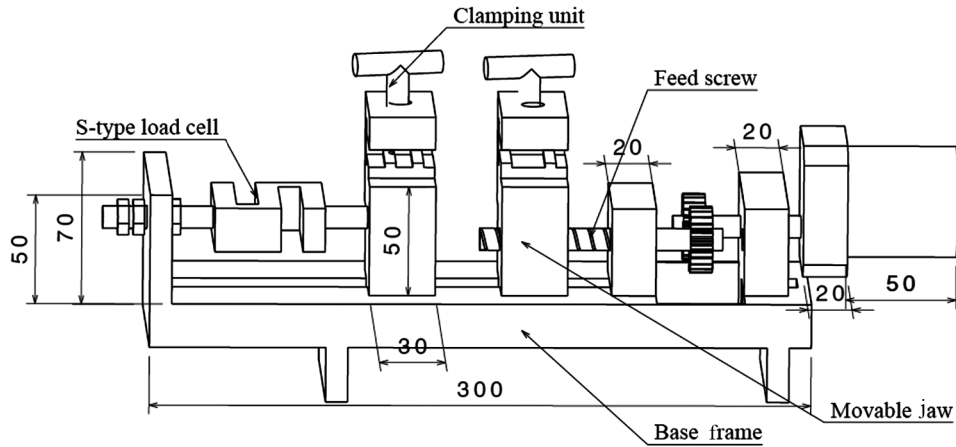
Designed mechanical fiber breaking unit with dimensions in mm.
